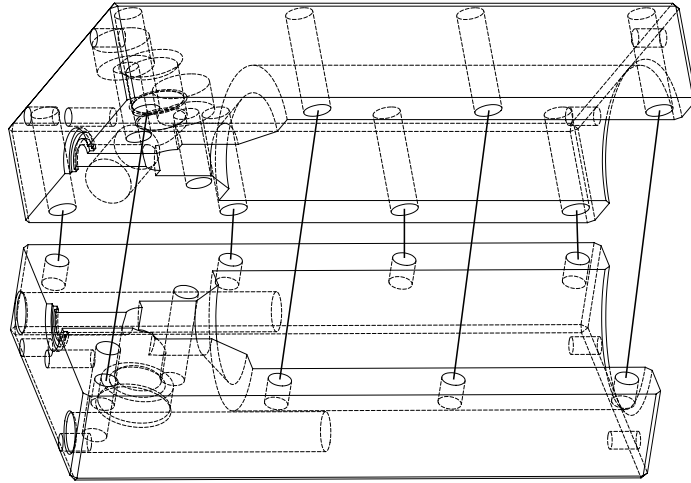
CAD-drawings of split chamber of prototype III. For this prototype two matching halves have been machined, a bottom and a top part. If only the bottom half is attached to the CNM, direct examination of the beam path is possible. This provides great freedom to inspect, debug and precisely adjust the whole setup, which is an integral feature of this design.
